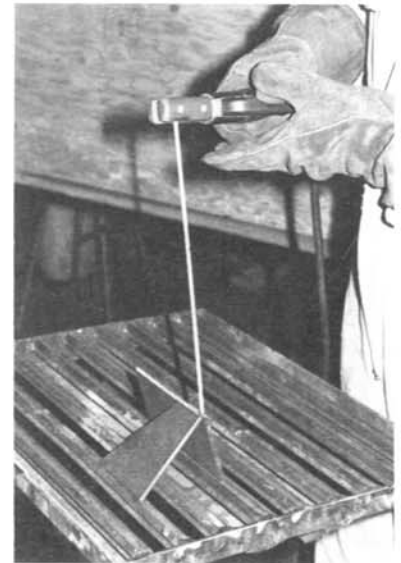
For corner weld, side angle should be 45 degrees (bisecting the corner angle) and incline angle should be 30 degrees.
